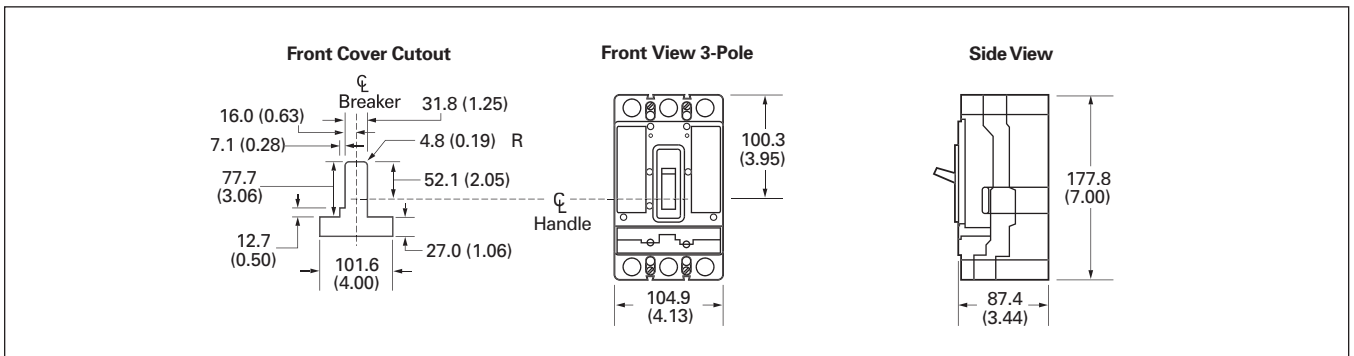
GJ-Frame — Dimensions in mm (Inches)
